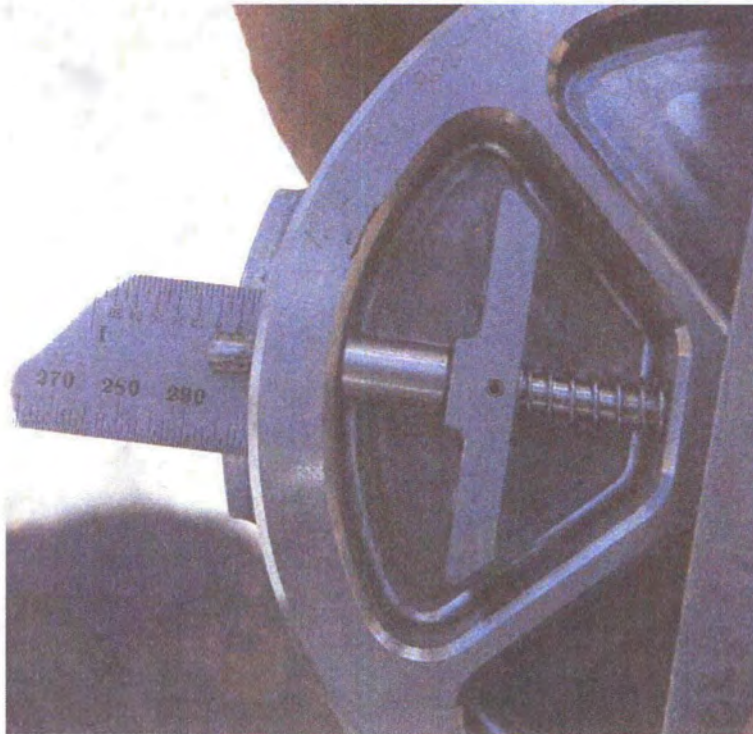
Inspection of Closure Assembly Following CD1-1
